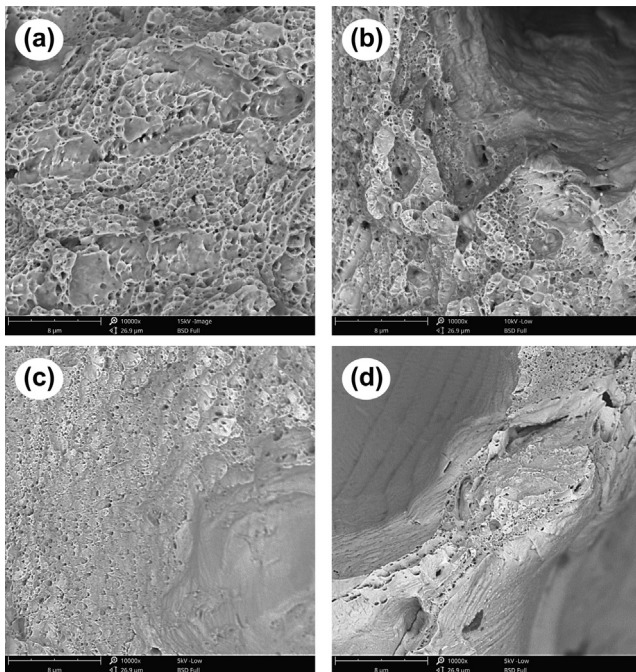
SEM images of fracture surfaces at high magnification: T1 ring (a), T2 ring (b) T3 ring (c) and T3 ring (d).
